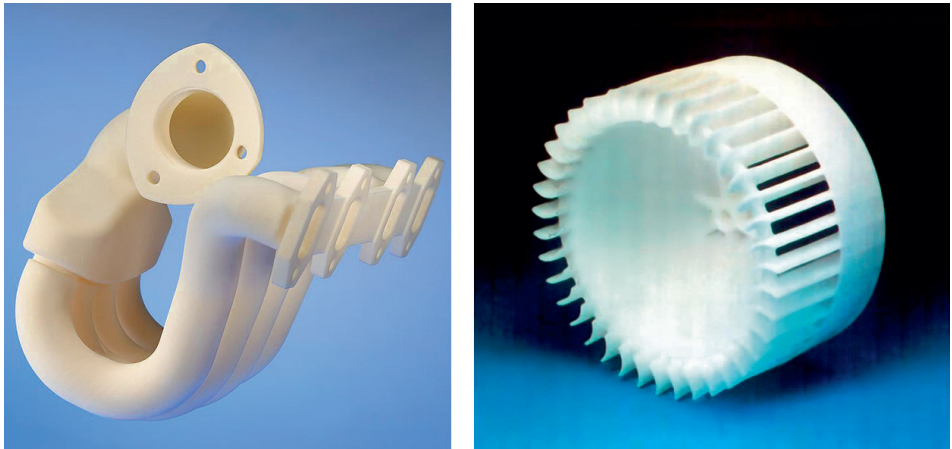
Selective laser sintering, SLS (3D Systems): engine exhaust manifold; prototype, polyamide (left); fan rotor, final part (right)
